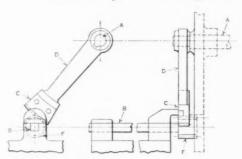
HELICAL-GEAR SEGMENT AND PINION USED AS CAMS TO PRODUCE LONGITUDINAL RECIPROCATION FROM ROCKING MOVE-
